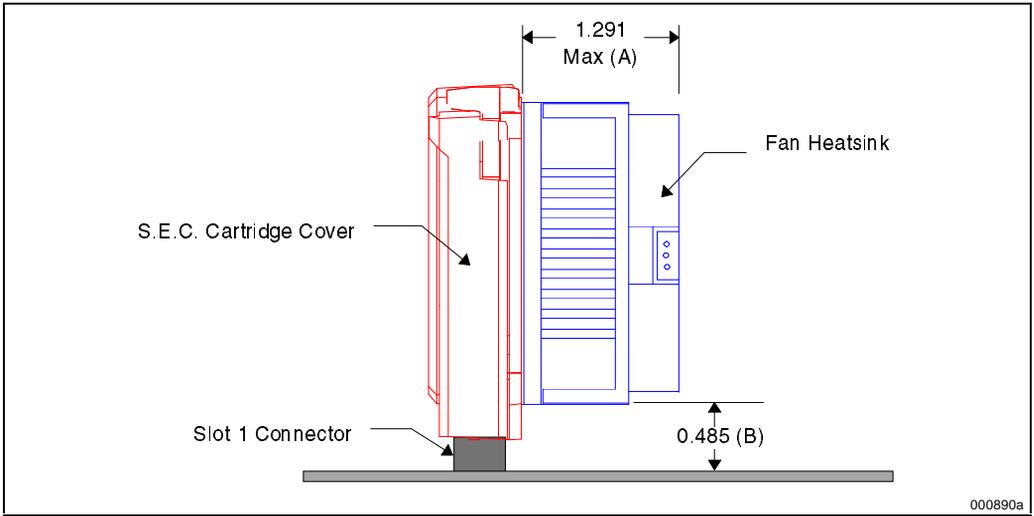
Side View Space Requirements for the Boxed Processor (Fan/heatsink supports not shown)
